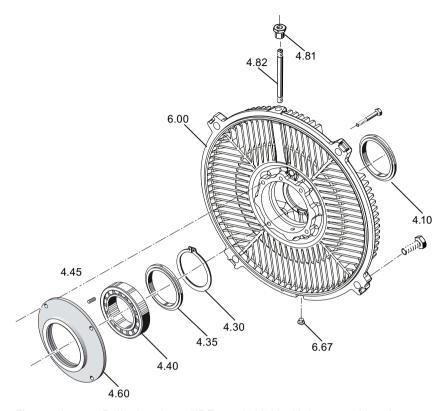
Roller bearings, NDE - end shield with integrated bearing cover
